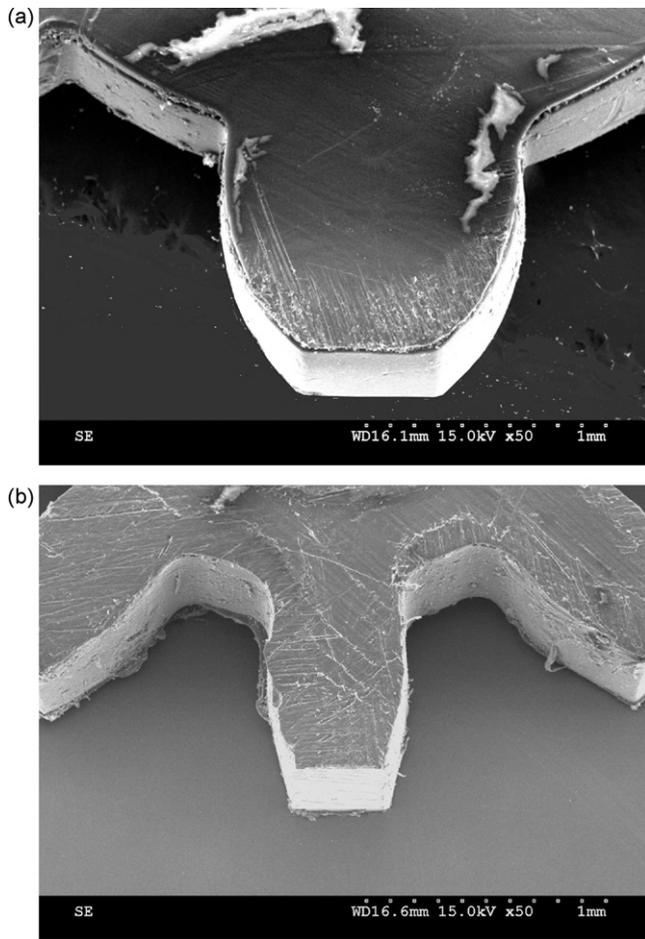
The SEM photographs of micro-injection molded gears: (a) the 6 mm gear and (b) the 4 mm gear.
